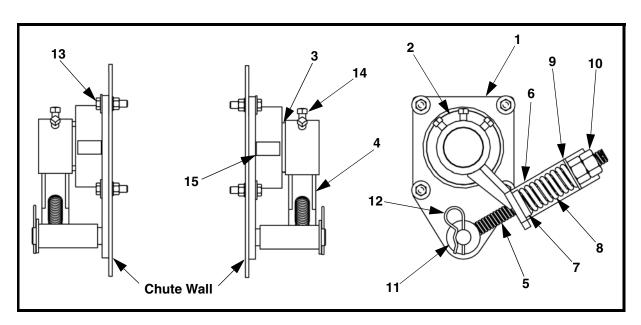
Martin<sup>®</sup> Dual Spring Tensioner XHD Assembly, P/N 38003-2
